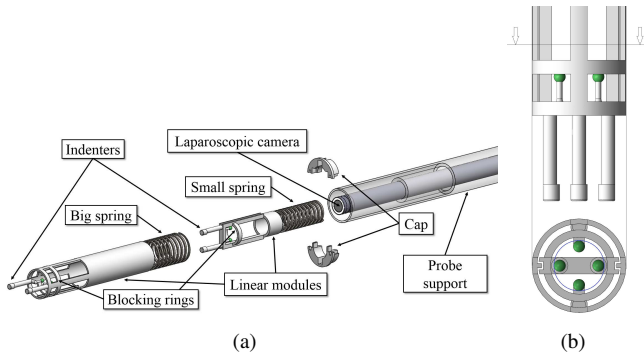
CAD Drawing of the Vision based Stiffness sensor. (a) Exploded and (b) Section view showing the camera Field of View (FOV).
